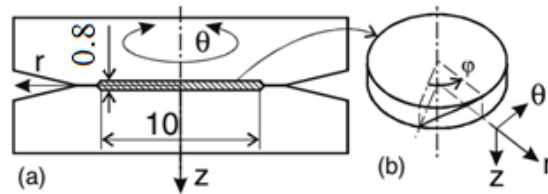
A schematic of the HPT processing and specimen, a) tool and dimensions (mm), b) HPT sample (adapted from [17]).
